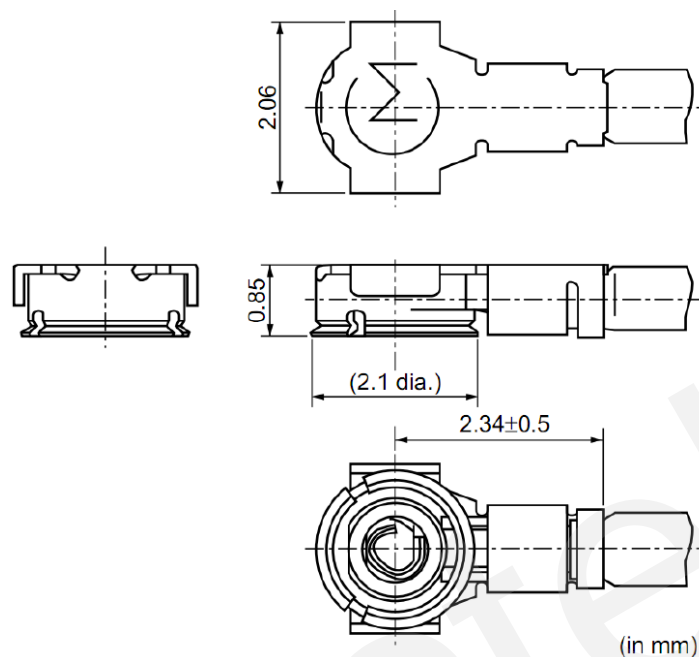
Specifications of Mating Plugs Using Ø0.81mm Coaxial Cables
